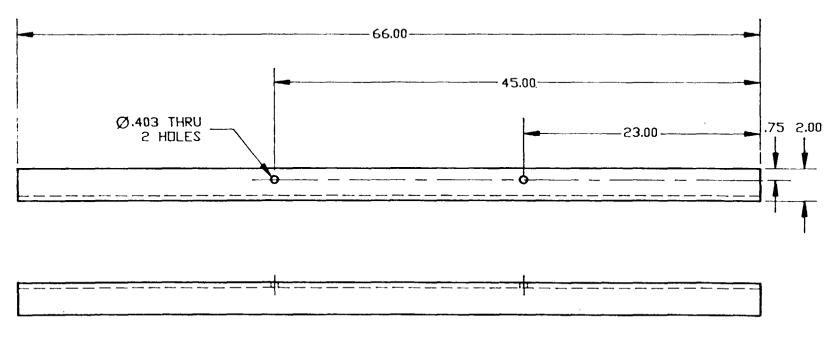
Tool Box Rack Assembly Part Number 20089720-7 (Sheet 7 of 11)
